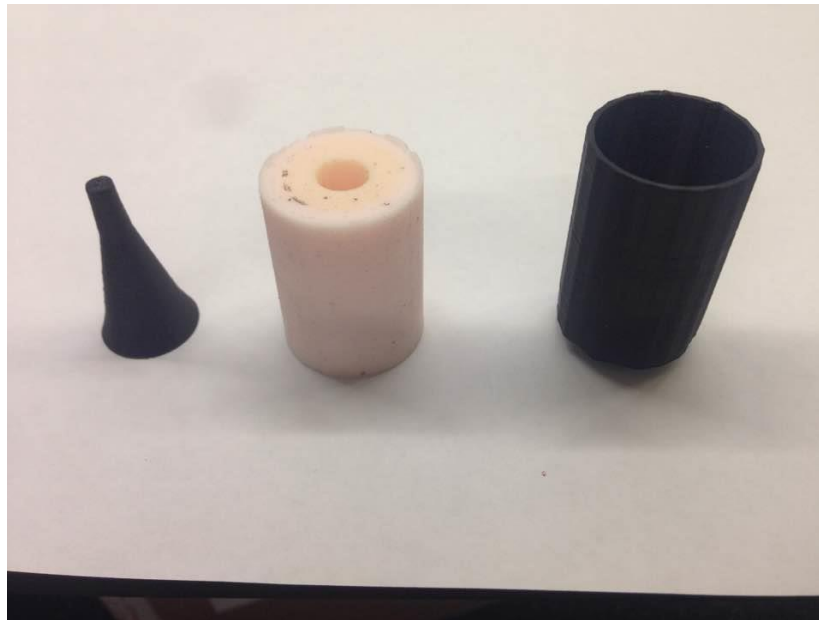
Cone-shaped template and its mold produced with the first method.
